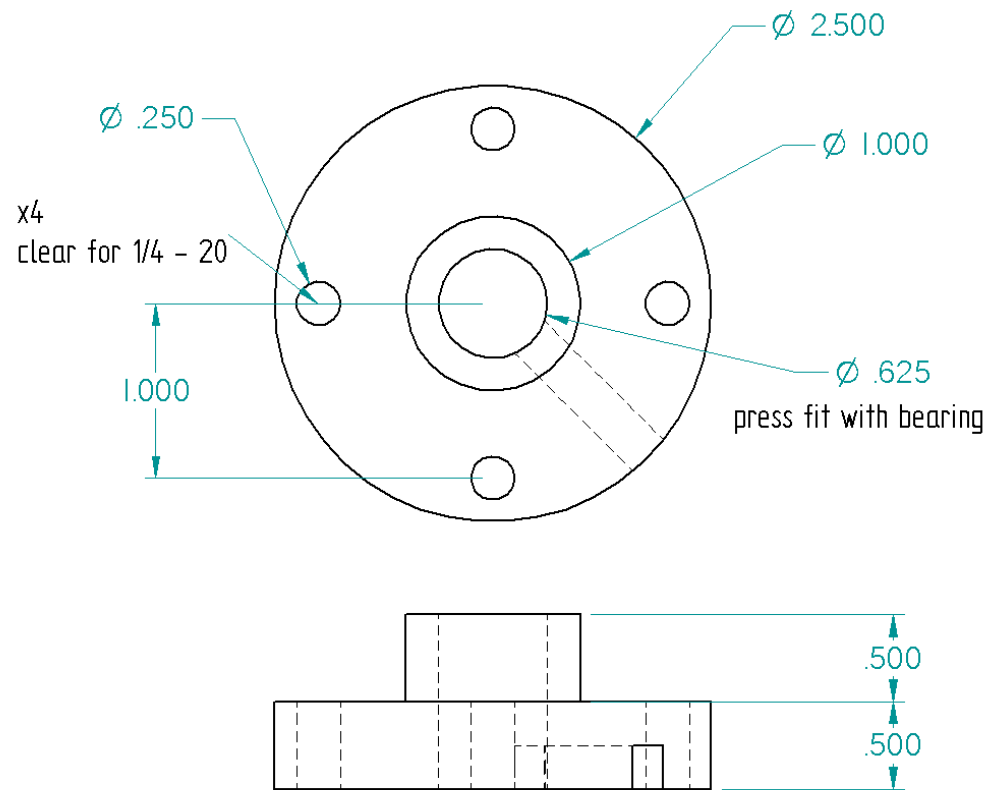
Bearing brace for modified transducer made of AISI 1018 magnetic steel.
